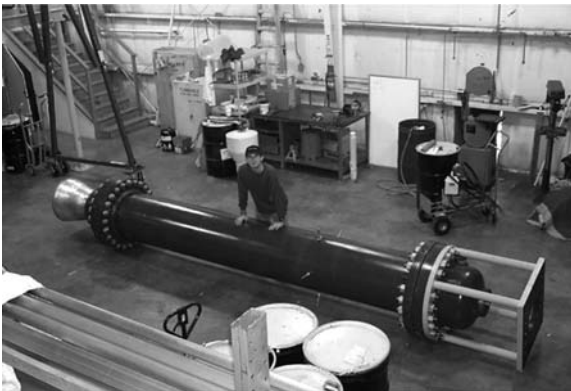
HYSR completed heavy-weight motor assembly [14].
